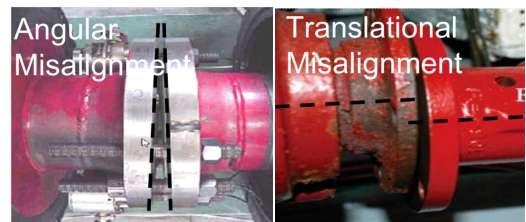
Typical misalignment cases in loading arm flanges during assembly
